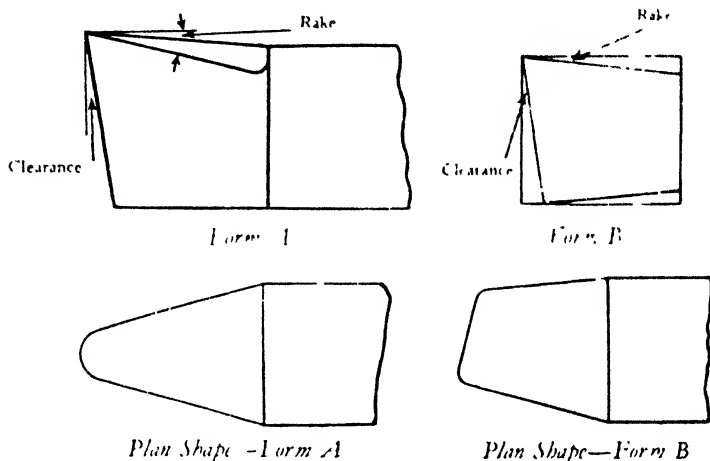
FORMS OF TOOLS FOR TURNING STAINLESS STEELS
